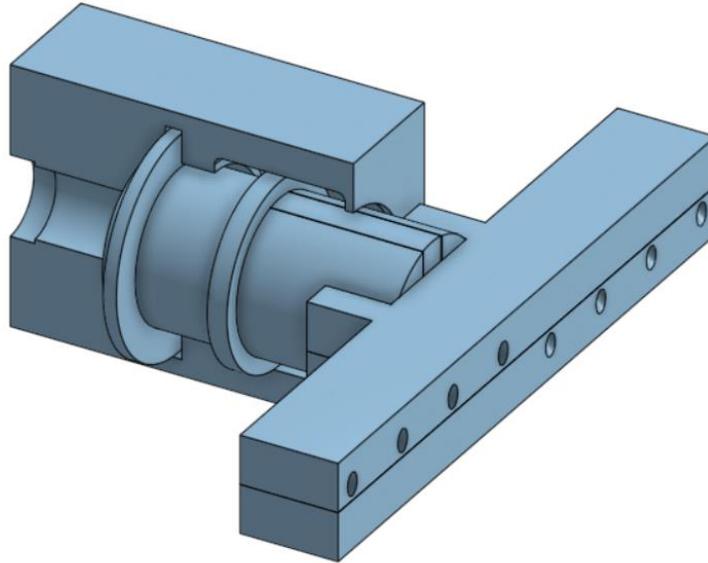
CAD model of assembled spinning jet (half of shaft housing removed)
